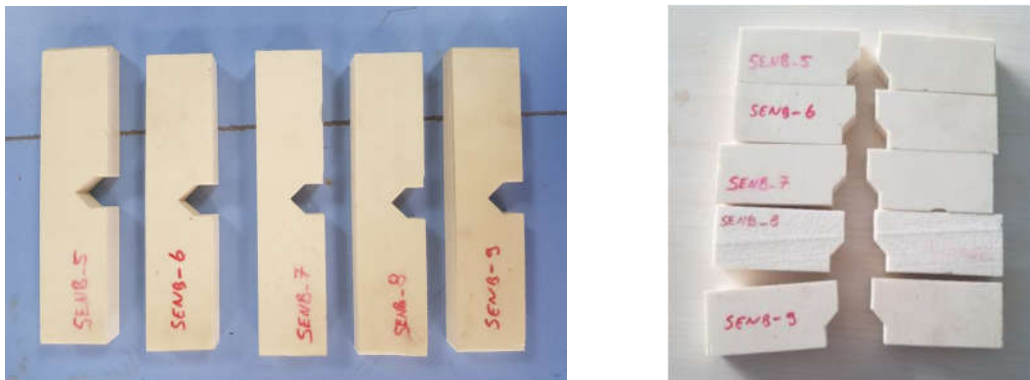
Fracture Toughness Test Samples (Left), Fractured Samples After Test (Right)
